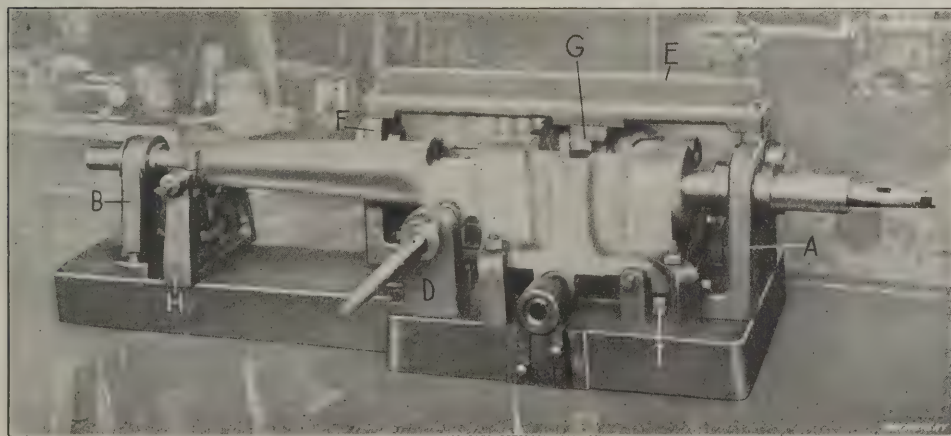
Boring Jig with Head Casting clamped in Place ready for Boring
